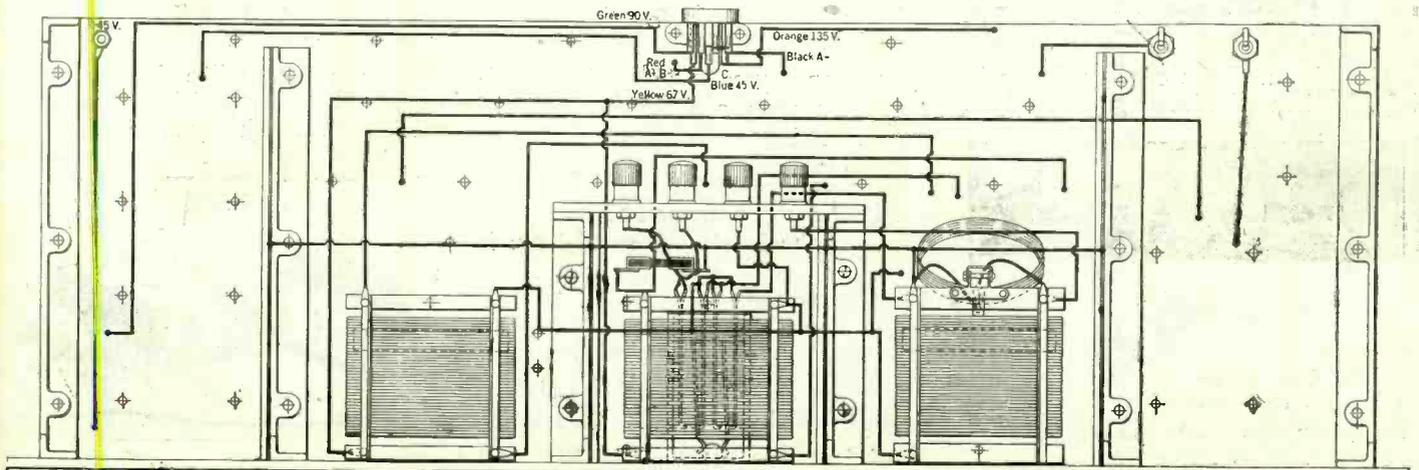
Bottom view of set showing location of center holes in sub-base.
